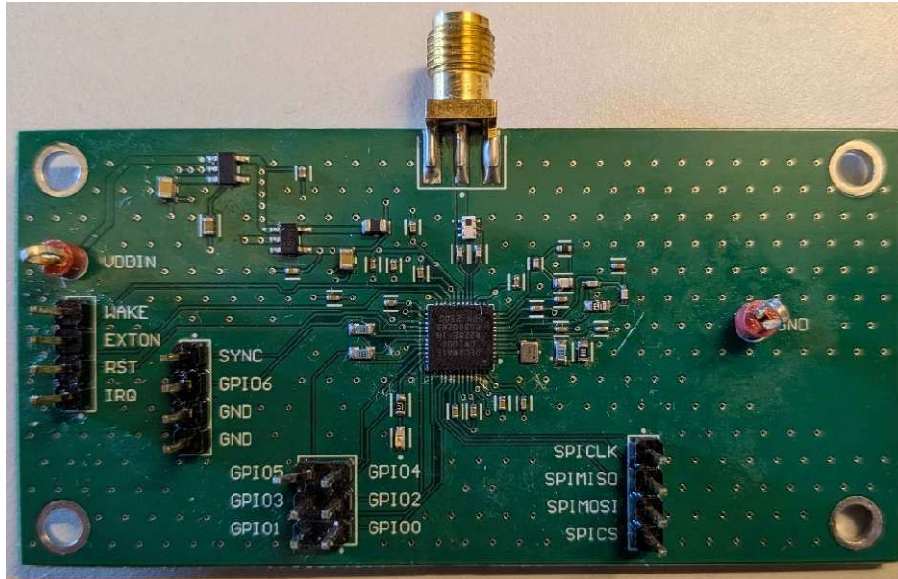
3D view of the DW1000 Evaluation PCB
